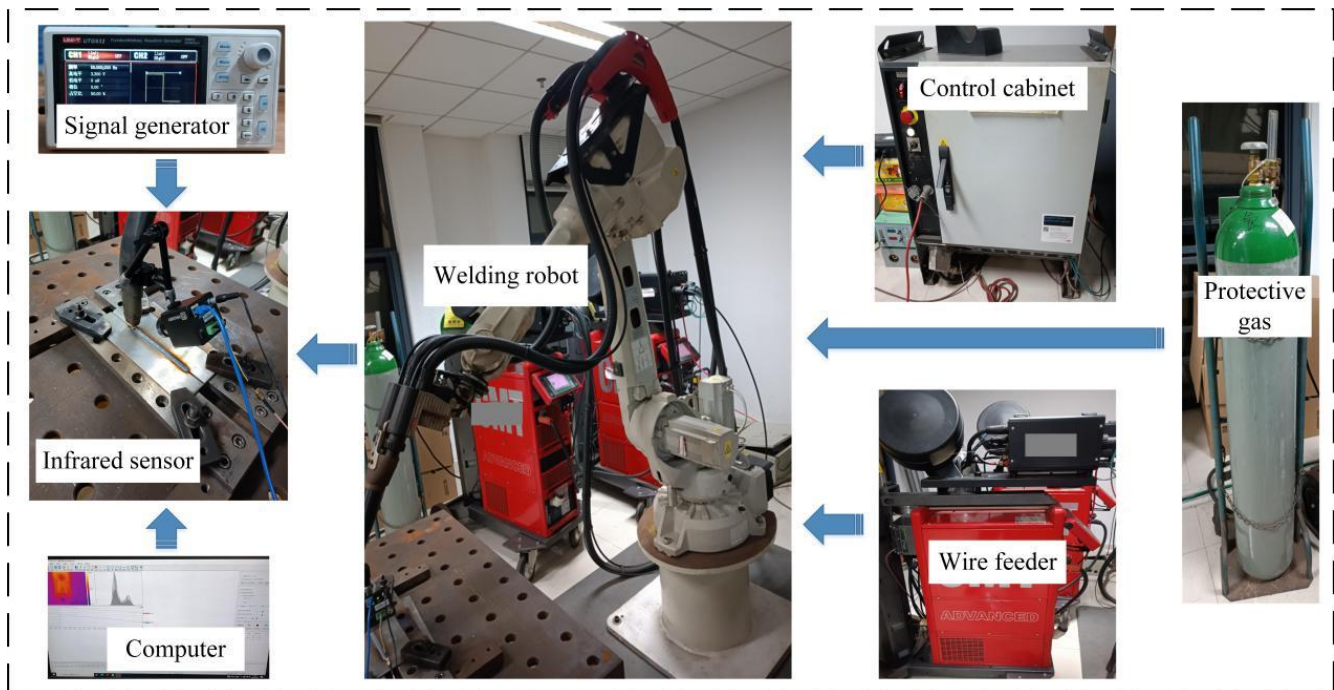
Welding penetration sensing system for variable groove weldments.
